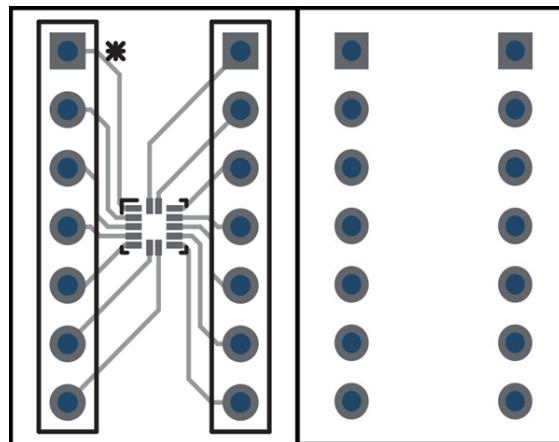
RUG package top layer (left) and bottom layer (right) PCB layout
